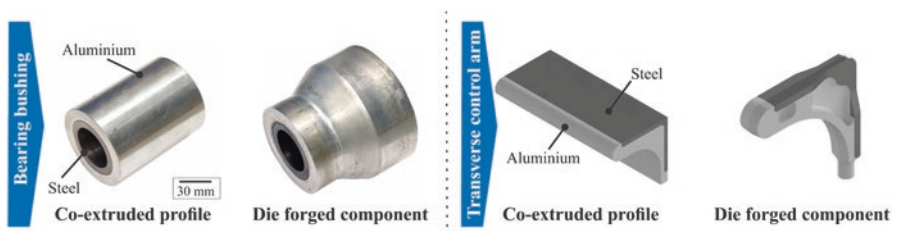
Co-extruded semi-finished profile and die forged component, left: bearing bushing, right: transverse control arm
